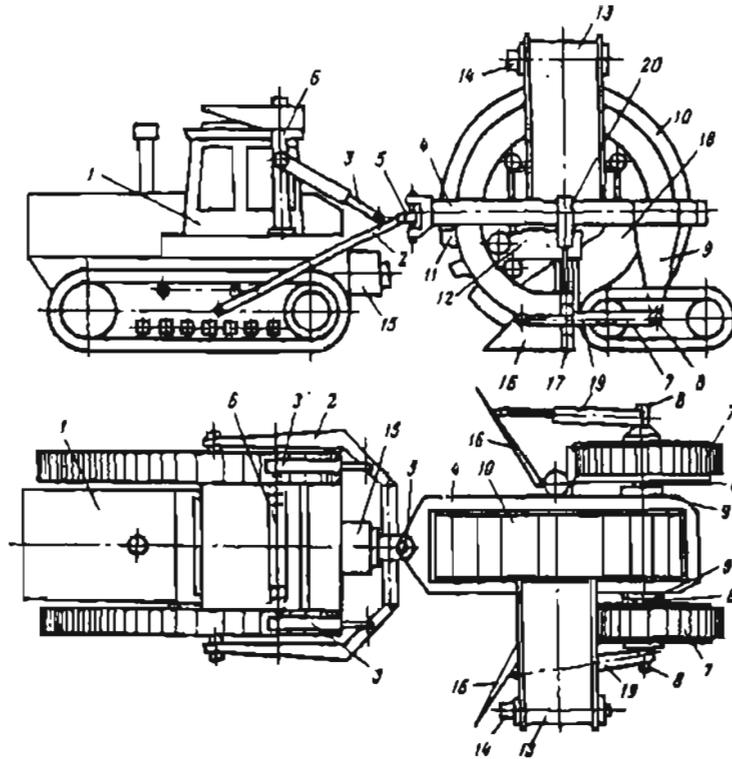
Design scheme of the excavating and loading unit; 1 -power unit (dozer); 2 -frame of the power unit; 3 -hydraulic cylinders; 4 -frame of the working unit; 5 -double hinge; 6 -protective canopy; 7 -undercarriage; 8 -undercarriage axle; 9 -brackets; 10 -wheel; 11 -bucket; 12 -bucket wheel drive; 13 -belt conveyor; 14 -belt conveyor drive; 15 -hydraulic pump; 16 -plowshare; 17 -hinge; 18 -plate of the unit's frame; 19, 20 -hydraulic cylinders (Emelianov, 1985)
